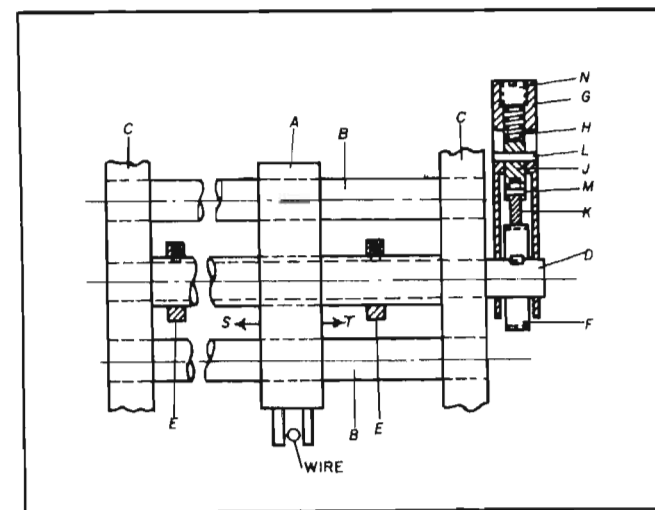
Front view of feed device which provides a continuously reversing linear movement. Drive wheel and linkage, shown in Fig. 8, are omitted for clarity.
